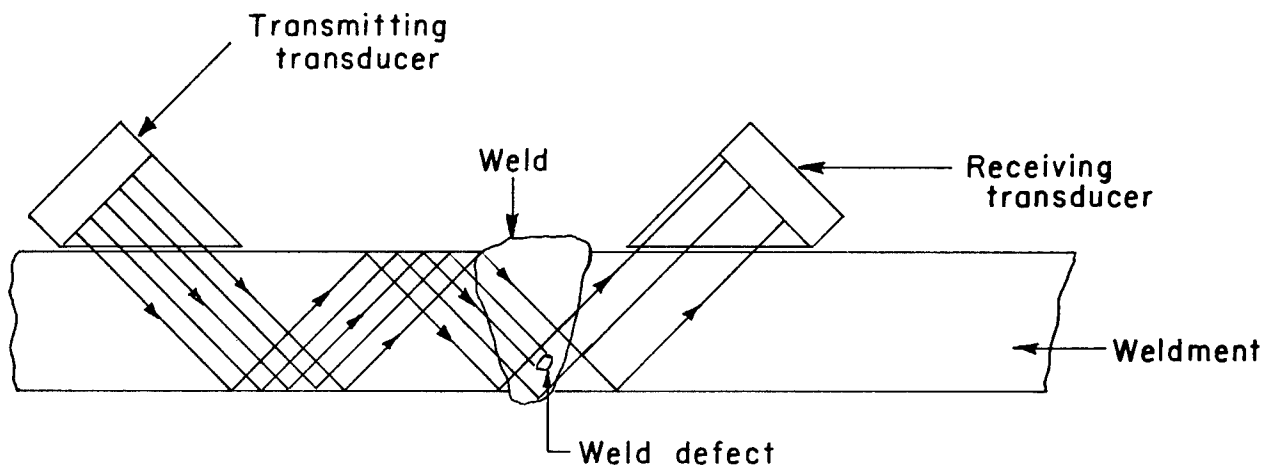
TWO-TRANSDUCER METHOD OF ULTRASONIC INSPECTION OF A WELD
